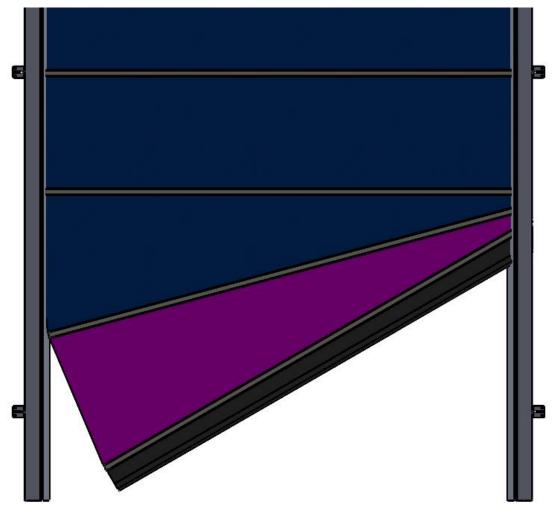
LIFT DOOR AND PULL OUT OF TRACK
